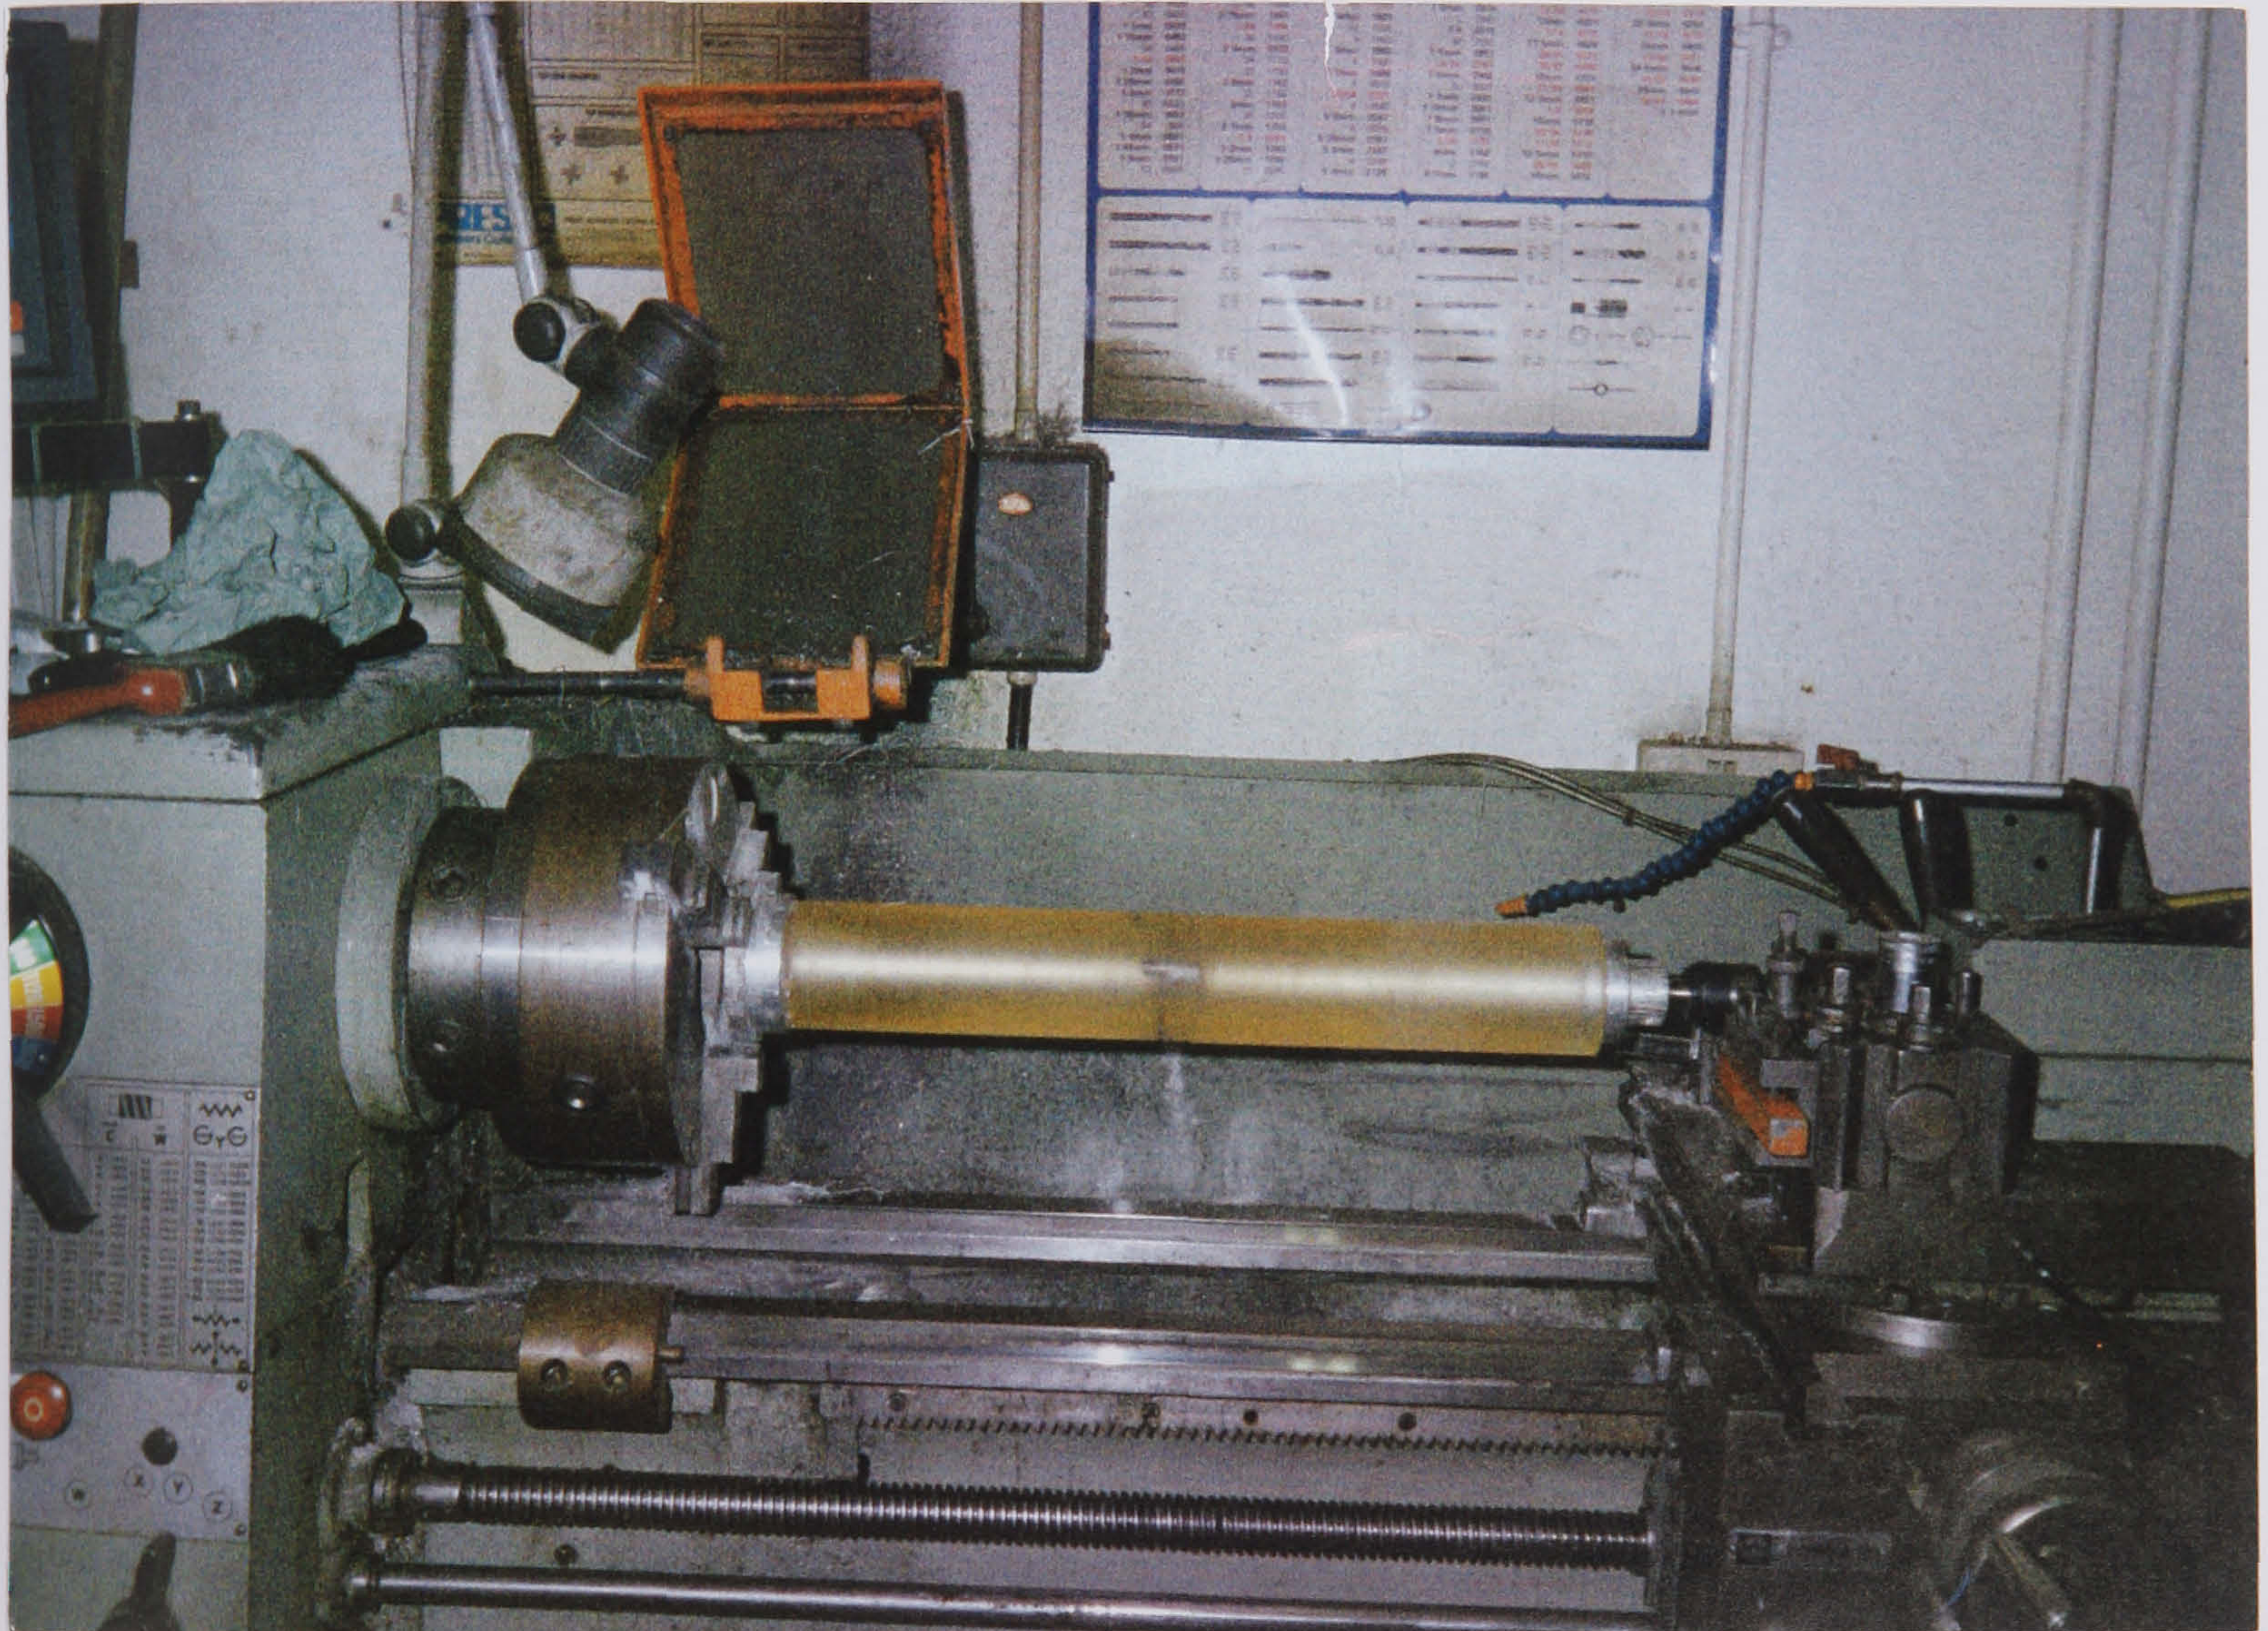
Photograph of the epoxy resin section being machined to fit into the jet-pump housing
